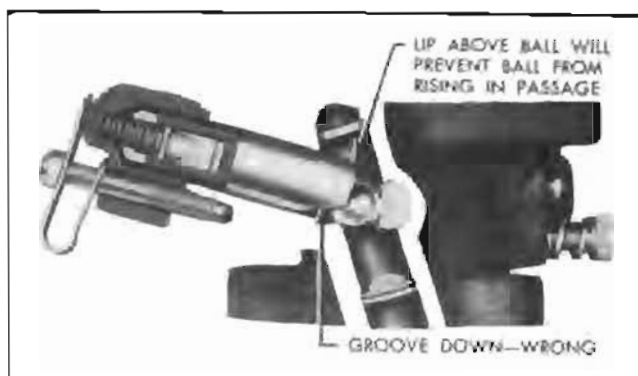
Carter Accelerator Vacuum Switch Incorrectly Assembled
